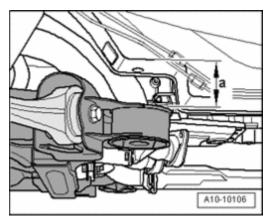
Lowering Engine/Transmission Assembly Using Scissor Lift Platform VAS 6131 Only Approx. By Dimension
